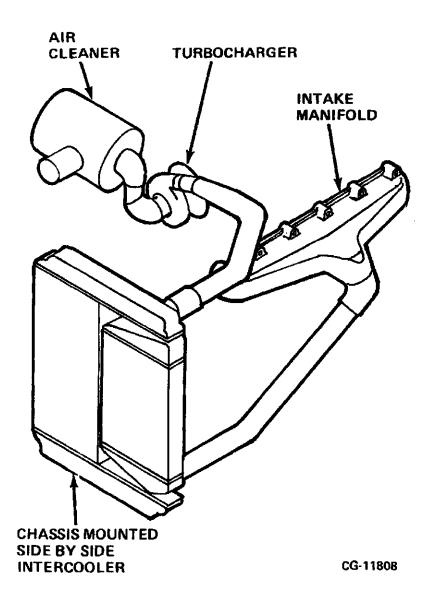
Chassis Mounted Intercooler and Piping Installation Schematic (Typical Right side View)
